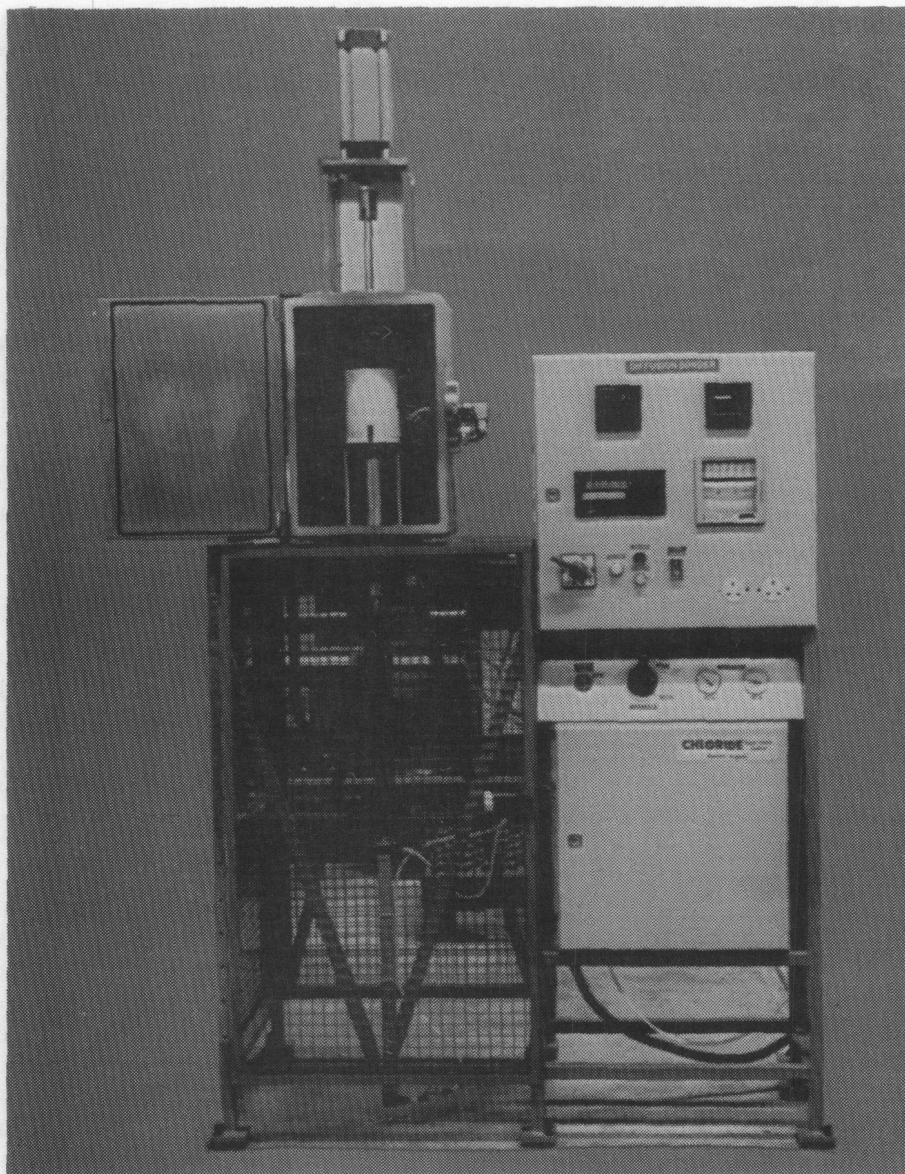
Prototype Production Machine for Ceramic-to-Metal Sealing
